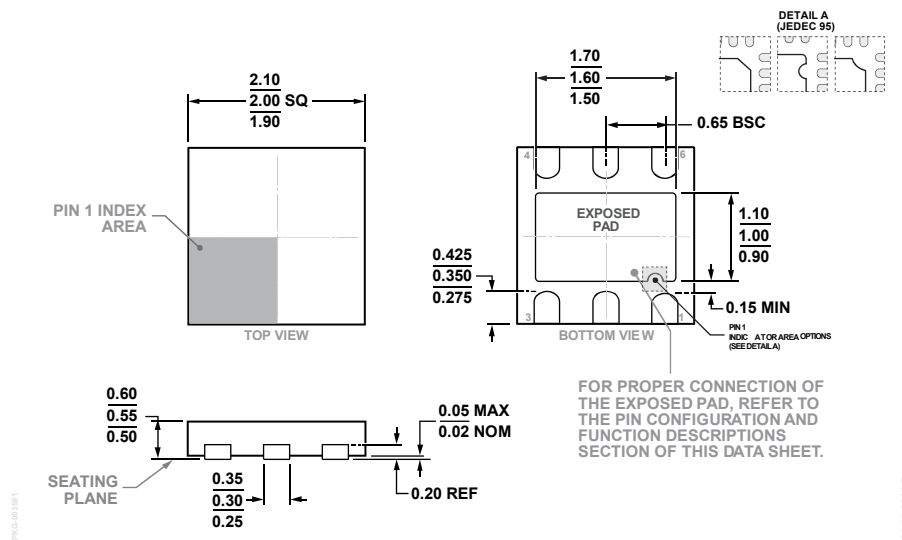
6-Lead Lead Frame Chip Scale Package [LFCSP] 2.00mm x 2.00mm Body and 0.55mm Package Height (CP-6-3)
